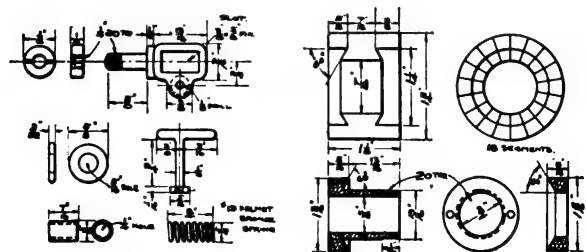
DETAILS OF COMMUTATOR AND BRUSH HOLDERS.
